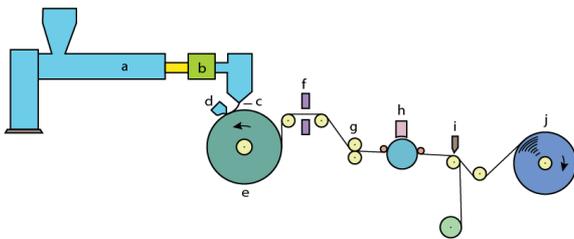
Extrusion molding machine units: a) Extruder; b) Filter; c) Slot die; d) Air knife; e) Cooling roll; f) Film thickness measuring device; g) Tension rolls; h) Corona treatment; i) Edge treatment; j) Winding [12].
